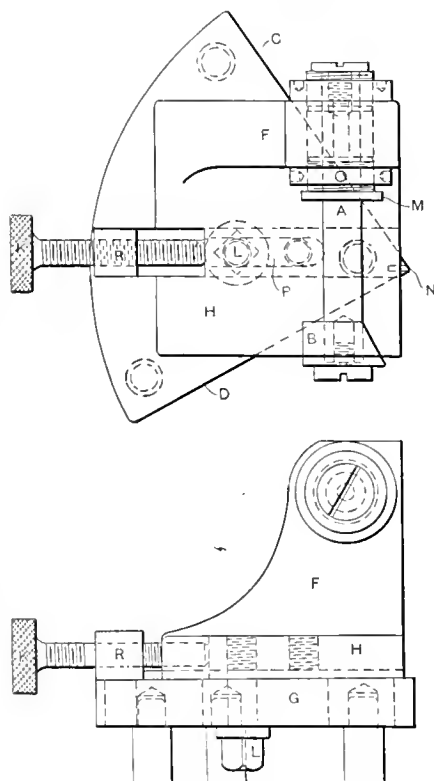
Device for Grinding Tap Fluting Cutter shown at A, Fig. 1.
